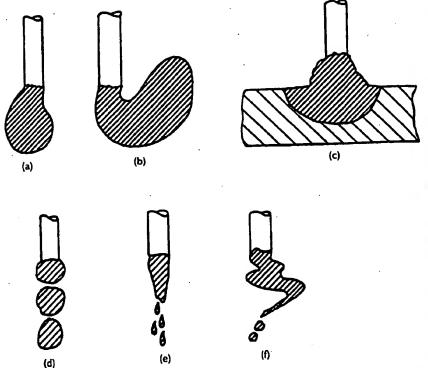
Schematic of the predominant modes of molten metal transfer in the gas-metal arc welding (GMAW) process: (a) drop globular, (b) repelled globular, (c) short-circuiting, (d) projected spray, (e) streaming spray, and (f) rotating spray. (From *Joining of Advanced Materials* by R. W. Messler, Jr., published in 1993 by and used with permission from Butterworth-Heinemann, Woburn, MA.)
